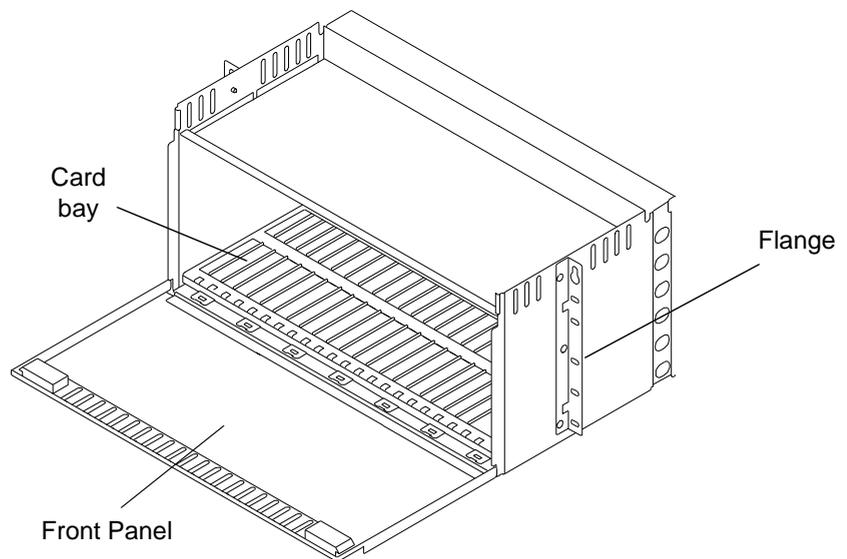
Low Pass Filter Shelf (LPFS8) Assembly
